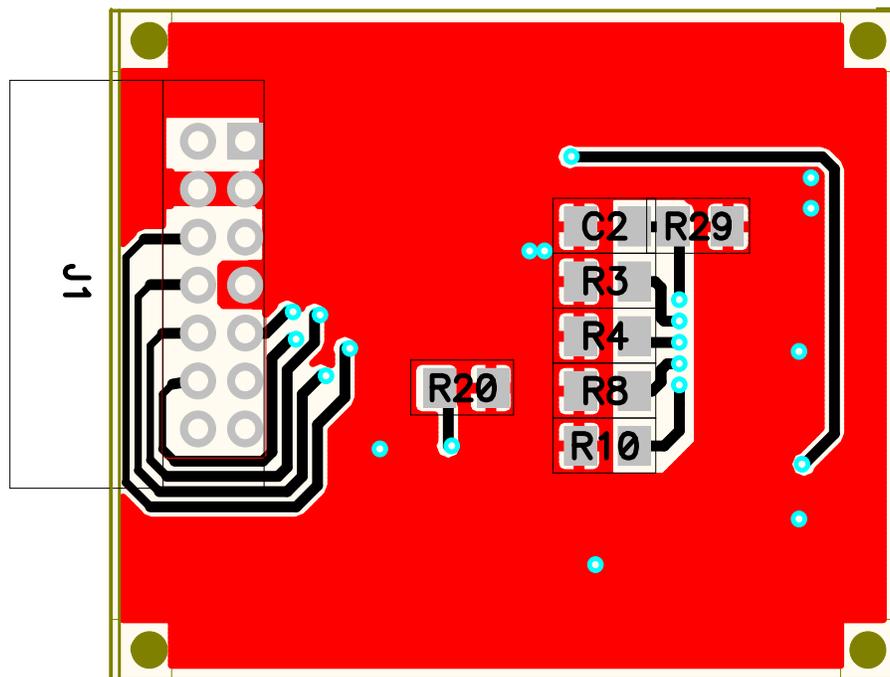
UCC27714EVM-551 Daughter Controller Card Bottom Layer Assembly Drawing (bottom view)
